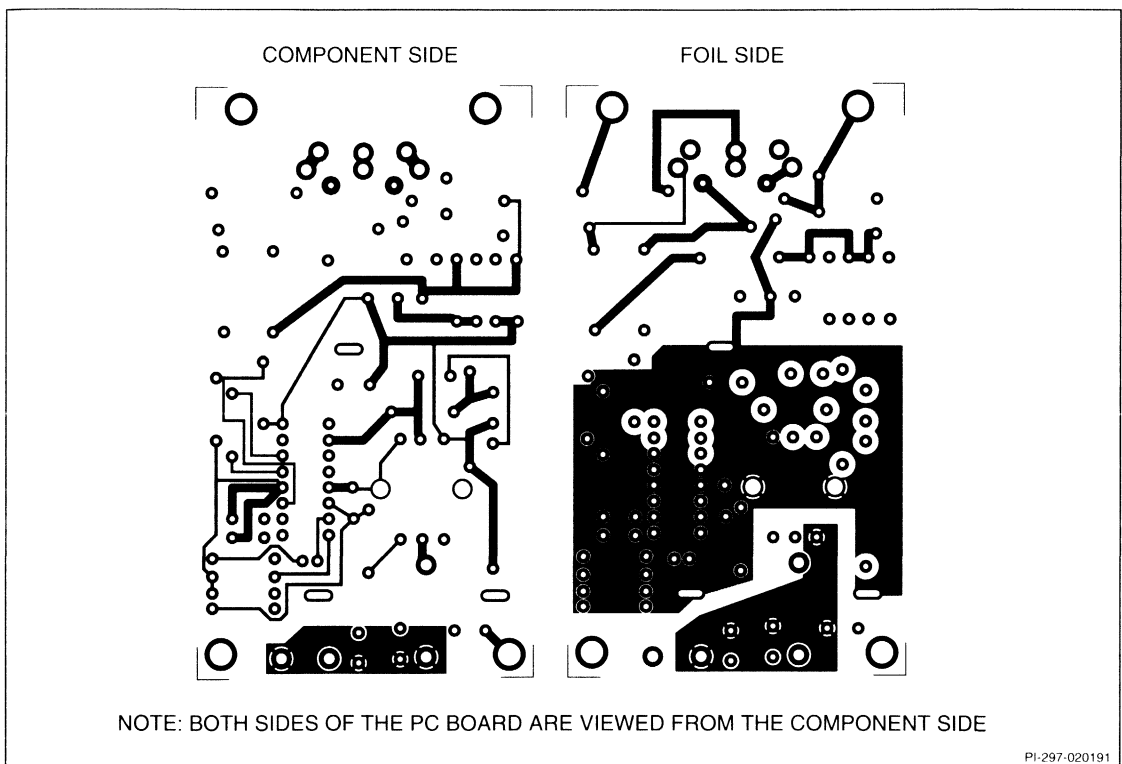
Layout of the PWR-EVAL1 Printed Circuit Board.
